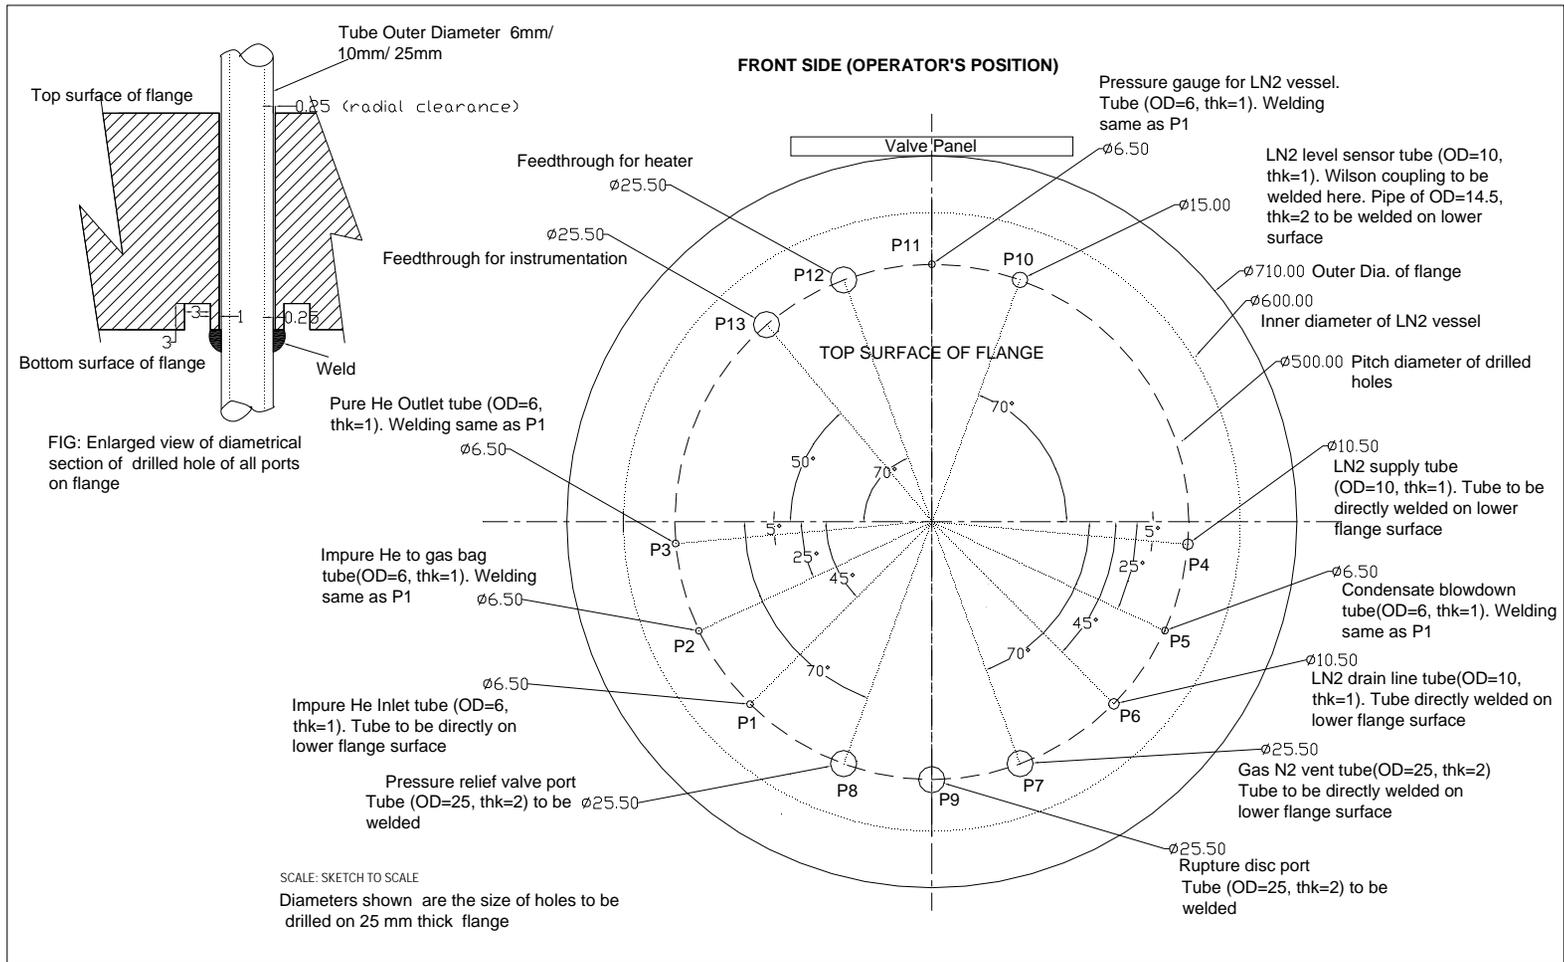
Location of ports on the top flange of LN₂ vessel
